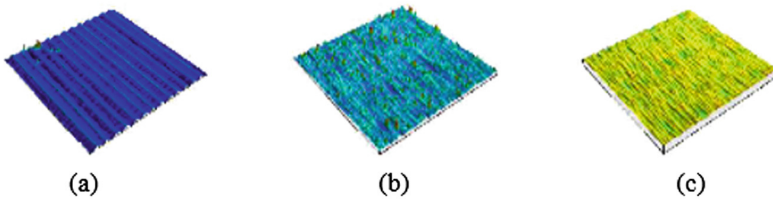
3D profiles of (a) Workpiece A (cutting+turning) (b) Workpiece B (cutting+turning+chromium plating) (c) Workpiece C (cutting+turning+chromium plating+grinding)
